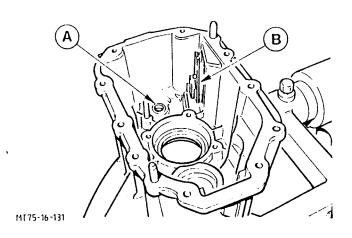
A - Main selector shaft ball sleeve B - Selector gate
